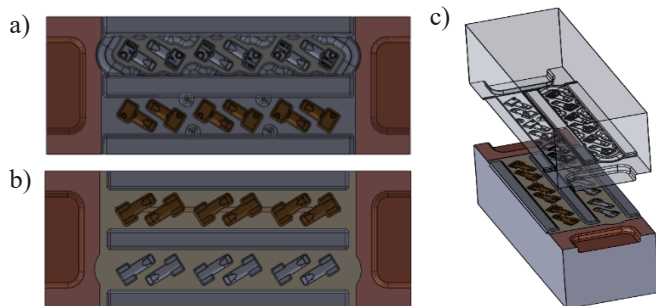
Forging tool construction in the arrangement: 6 elements rotated by 35° with folding 40×90 mm and bending of the flash into a channel shape: a) lower die, b) upper die, c) 3D view
